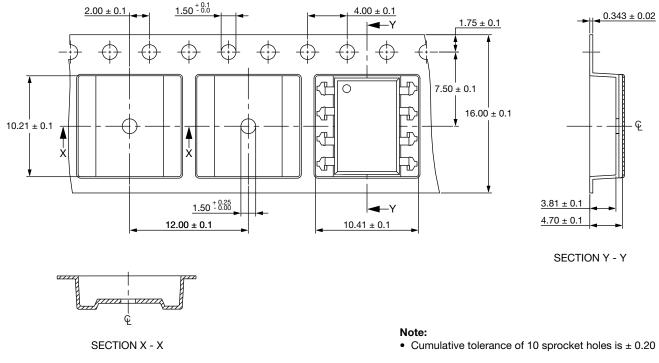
Tape and Reel Packing for SMD-8, Option 7 (1000 pieces on reel)
